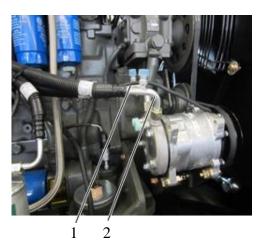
1 High pressure pipe of compressor 2 Low pressure pipe of compressor
